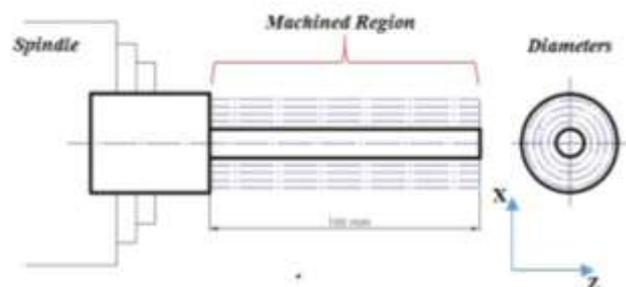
Illustration of machined part used for X-axis geometric errors determination.
